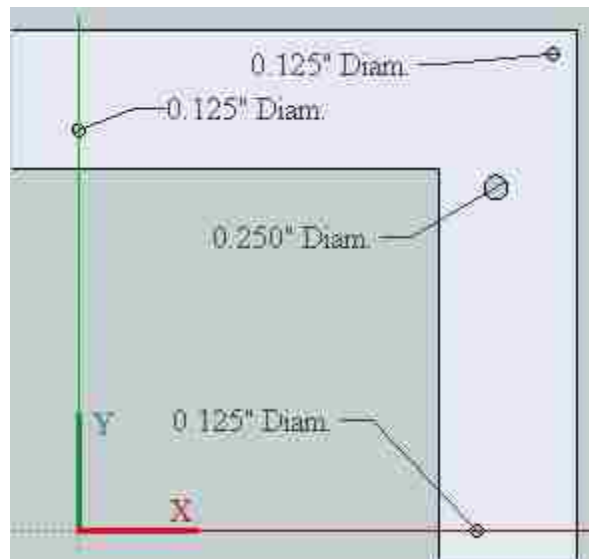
Top view of the 20x20 cm² lower trimmer aluminum plate illustrating hole dimensions.
